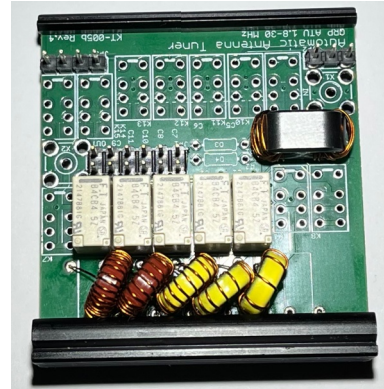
Top view of bottom board when installed into bottom part of the enclosure
